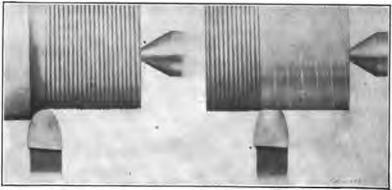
Boughing Out-Light Finishing Out and Coarse Feed
